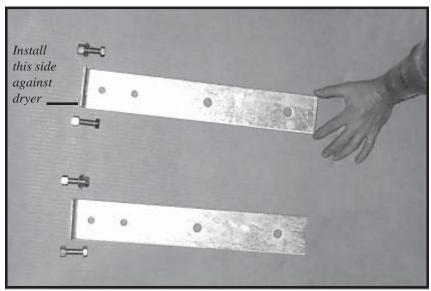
Motor mount support brackets (one used for SCR motor and one used for unload motor), nuts, bolts, and washer (for slotted hole on side rails).
